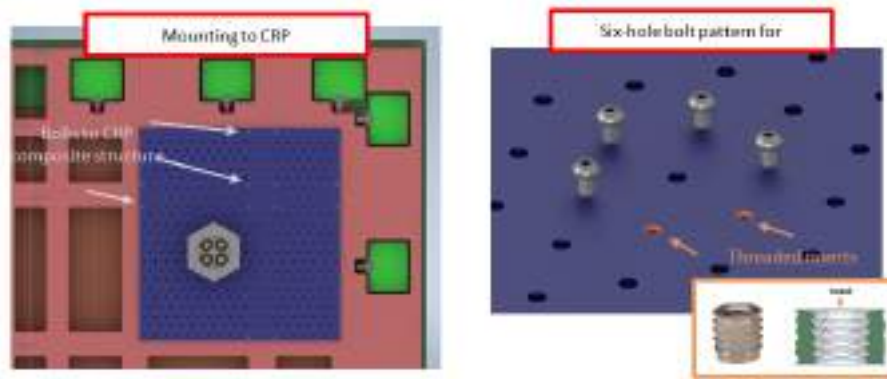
Adapter plates are attached to the CRUs at the CRP factory. Bottom supports are attached to the adapter plate using a six-holed bolt pattern.
